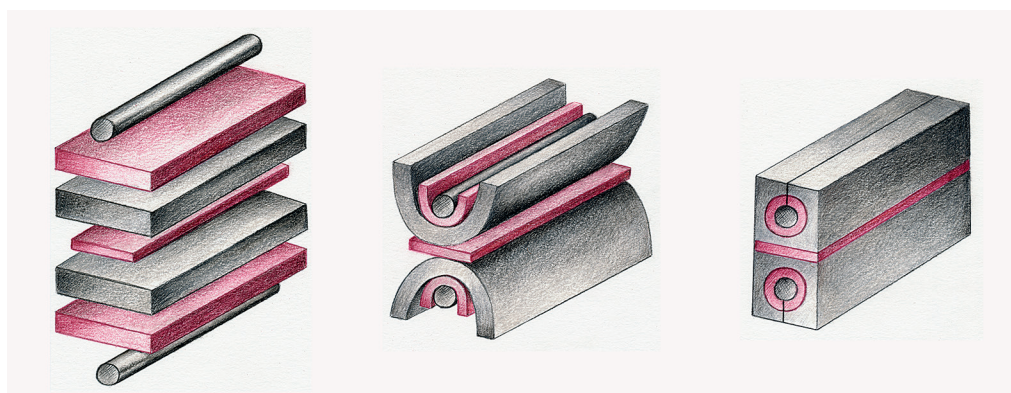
Structure of the welding package that was used to produce the composite rods.
